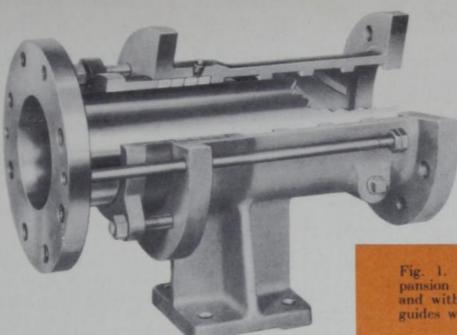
Webster Single Slip Type N Expansion Joint, Internally Guided, Flanged and with Integral Anchor. Note long spiral guides which keep in contact with slip tube throughout entire traverse.
